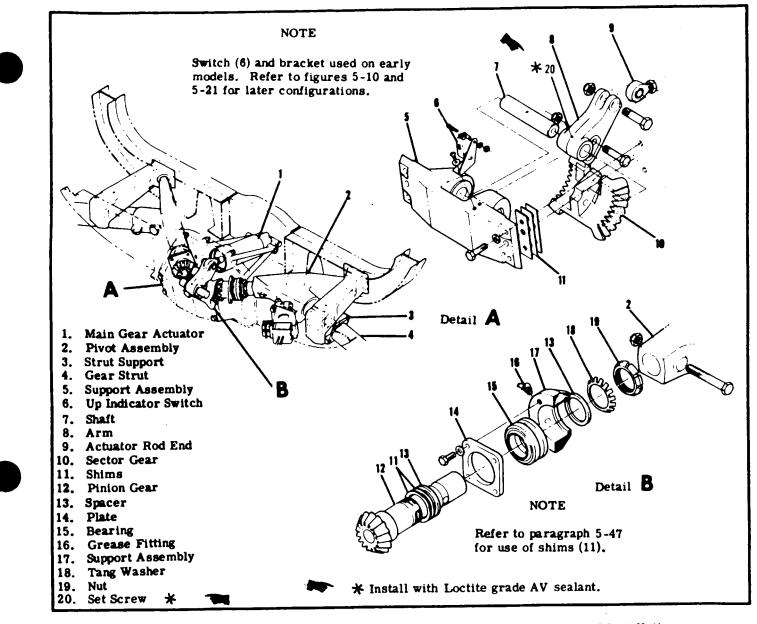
Sector Gear, Pinion Gear and Main Gear Actuator Removal and Installation
